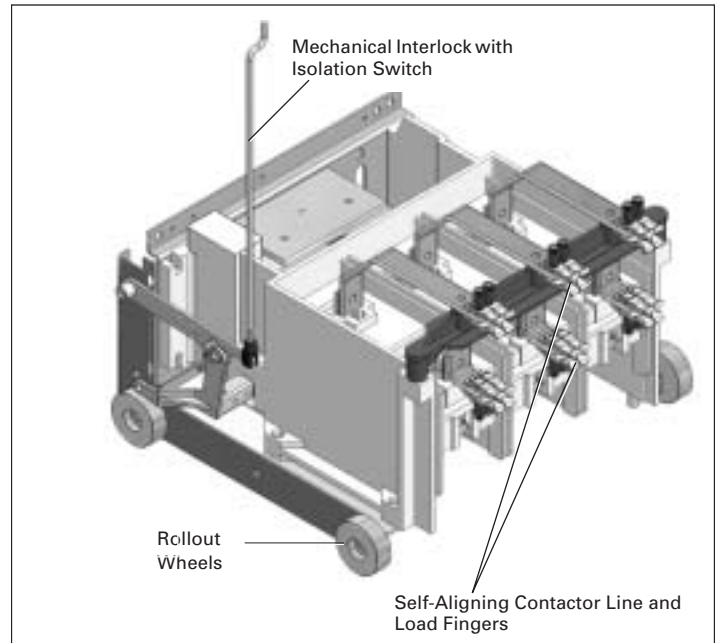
STAB-IN CONTACTOR MECHANICAL INTERLOCK
